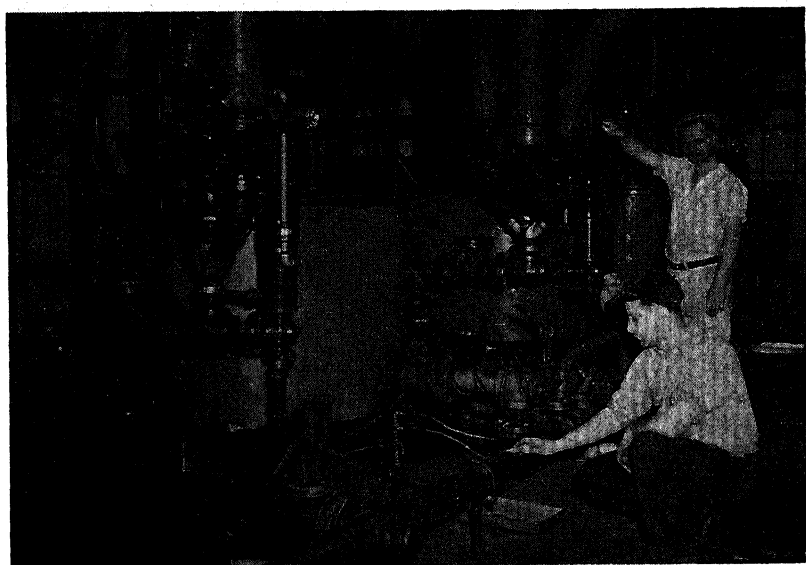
Piping in a large candy plant. Carries chocolate. All connections wherever possible, are welded.
